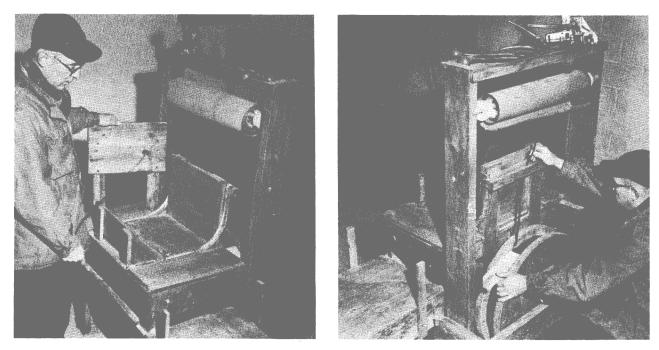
Packing table: Left, Steel tape being fed into aluminum channel guide; right, steel tape being brought from tape reel into position for bundling.
